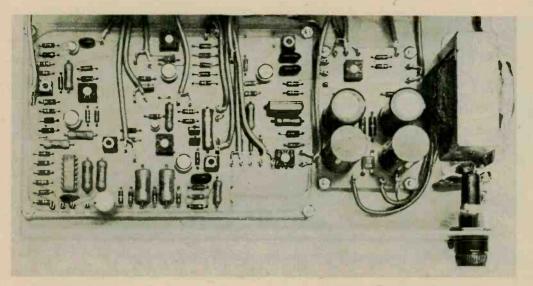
Mount boards to chassis as shown. Test points A, B are jumpered after meter circuit is calibrated.
